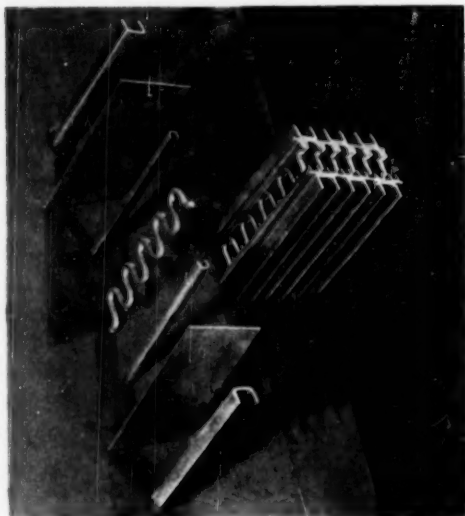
ENVELOPE CONSTRUCTION DETAIL
